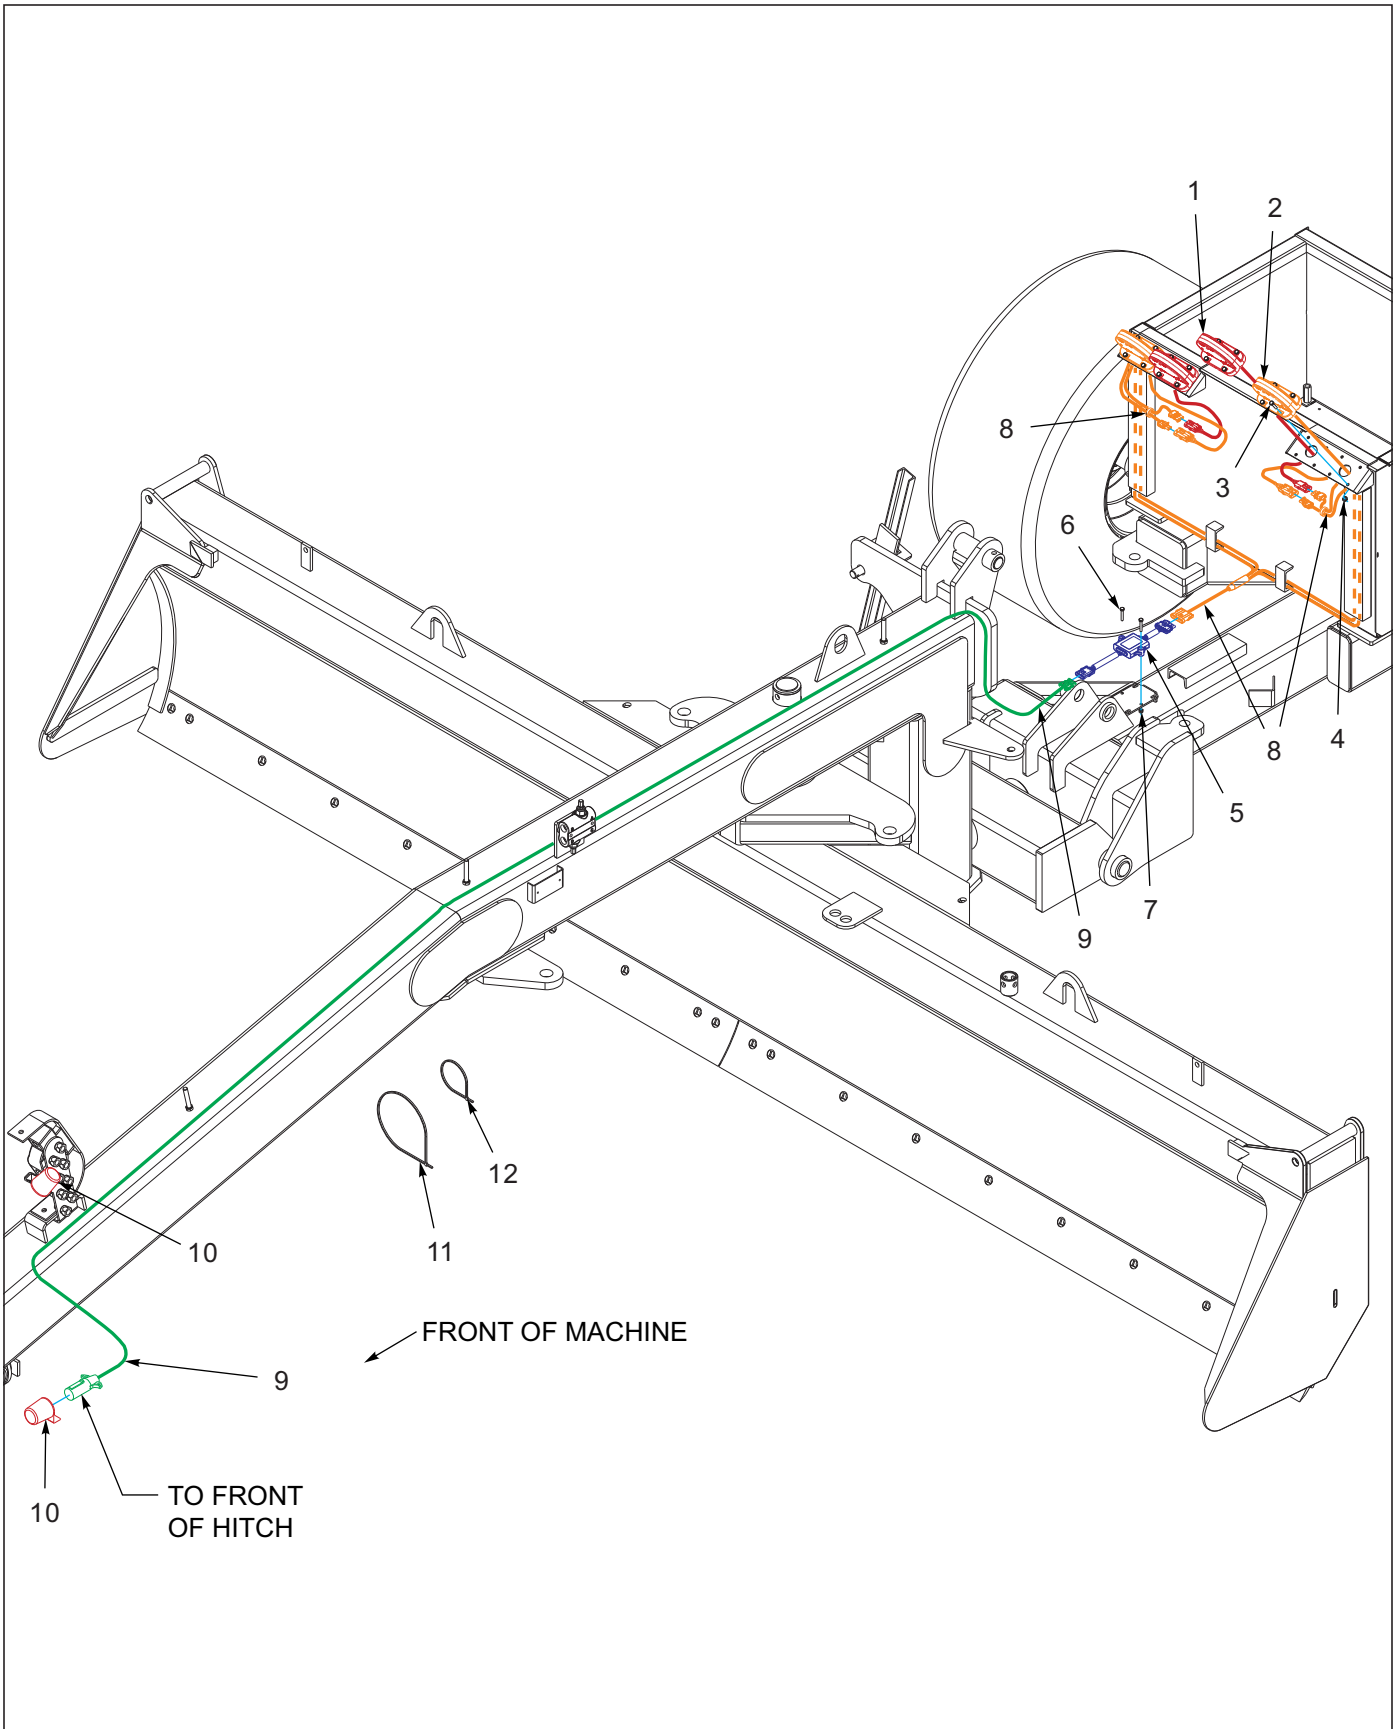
Electrical Assembly W/ LED Lights (2 of 2)
